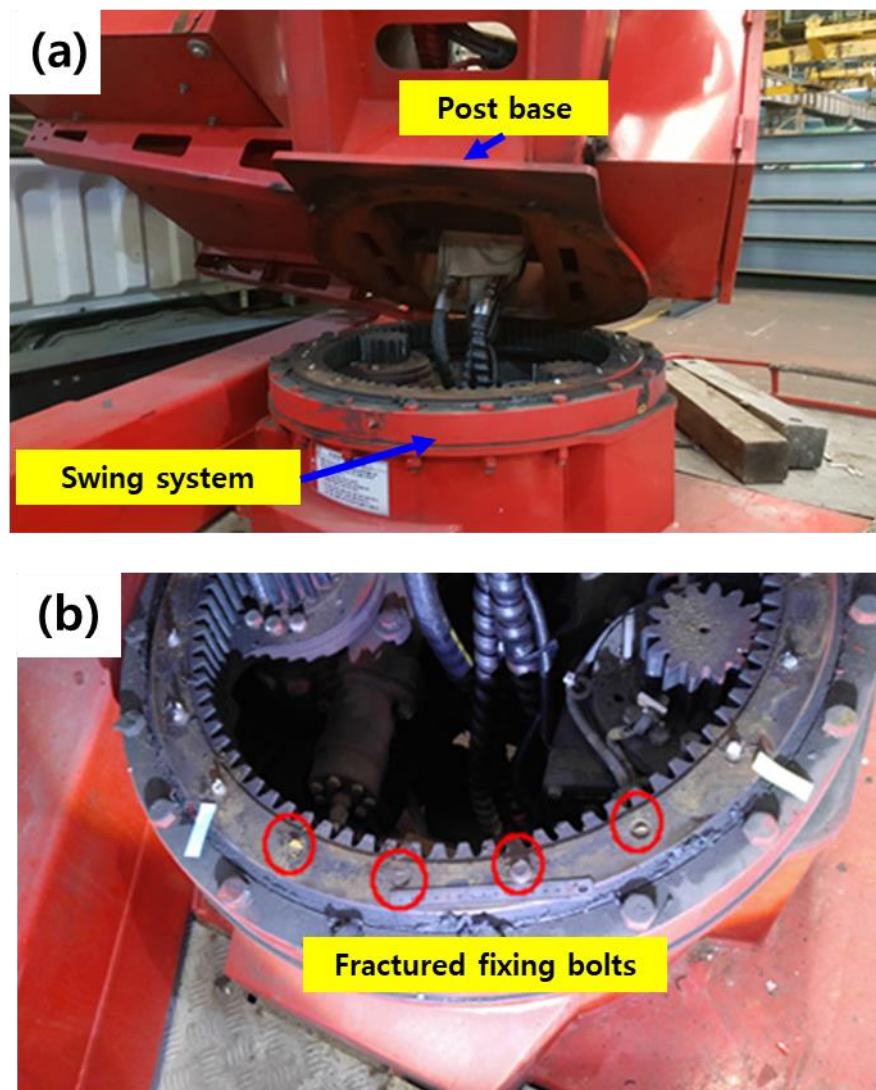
Failure scene of the fractured turntable fixing bolts: (a) turntable and boom after the accident and (b) fractured fixing bolts
